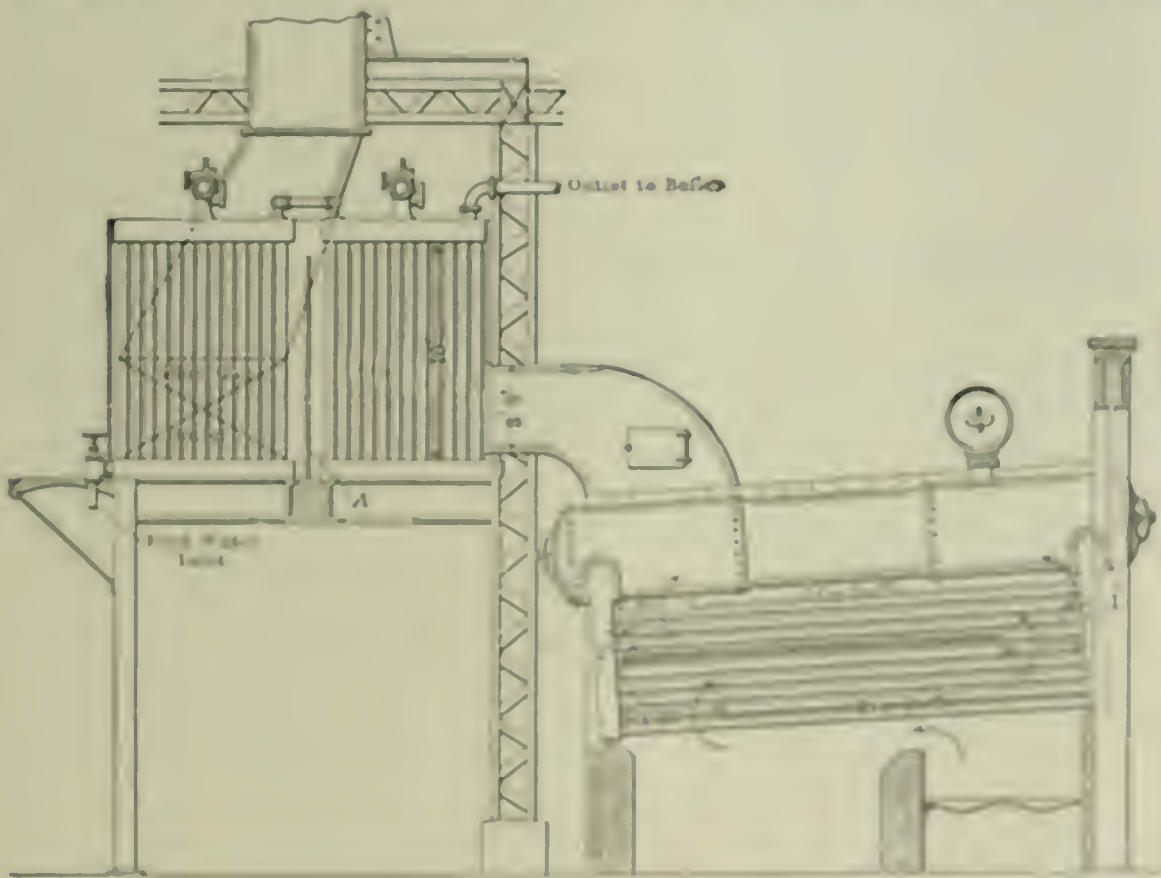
SECTION THROUGH BOILER AND ECONOMIZER.
